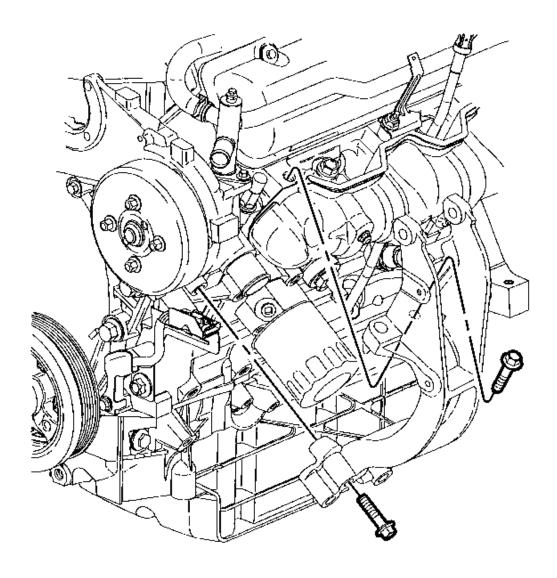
Installing Engine Mount Strut & A/C Compressor Bracket Courtesy of GENERAL MOTORS CORP.
